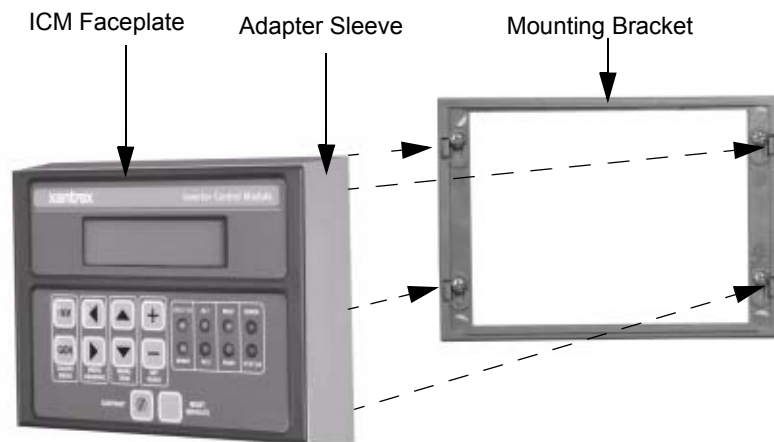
Mounting the ICM with Adapter Sleeve to the Mounting Bracket
